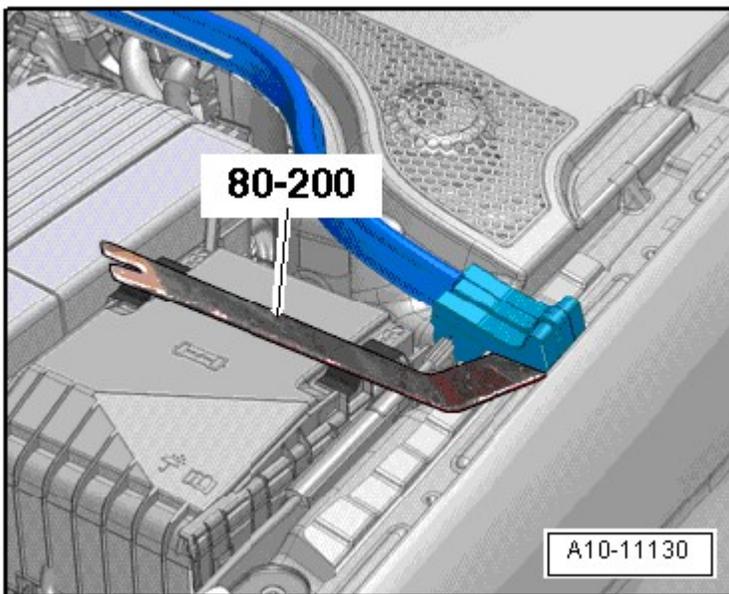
Identifying Seal Clip Removal With 80 - 200
